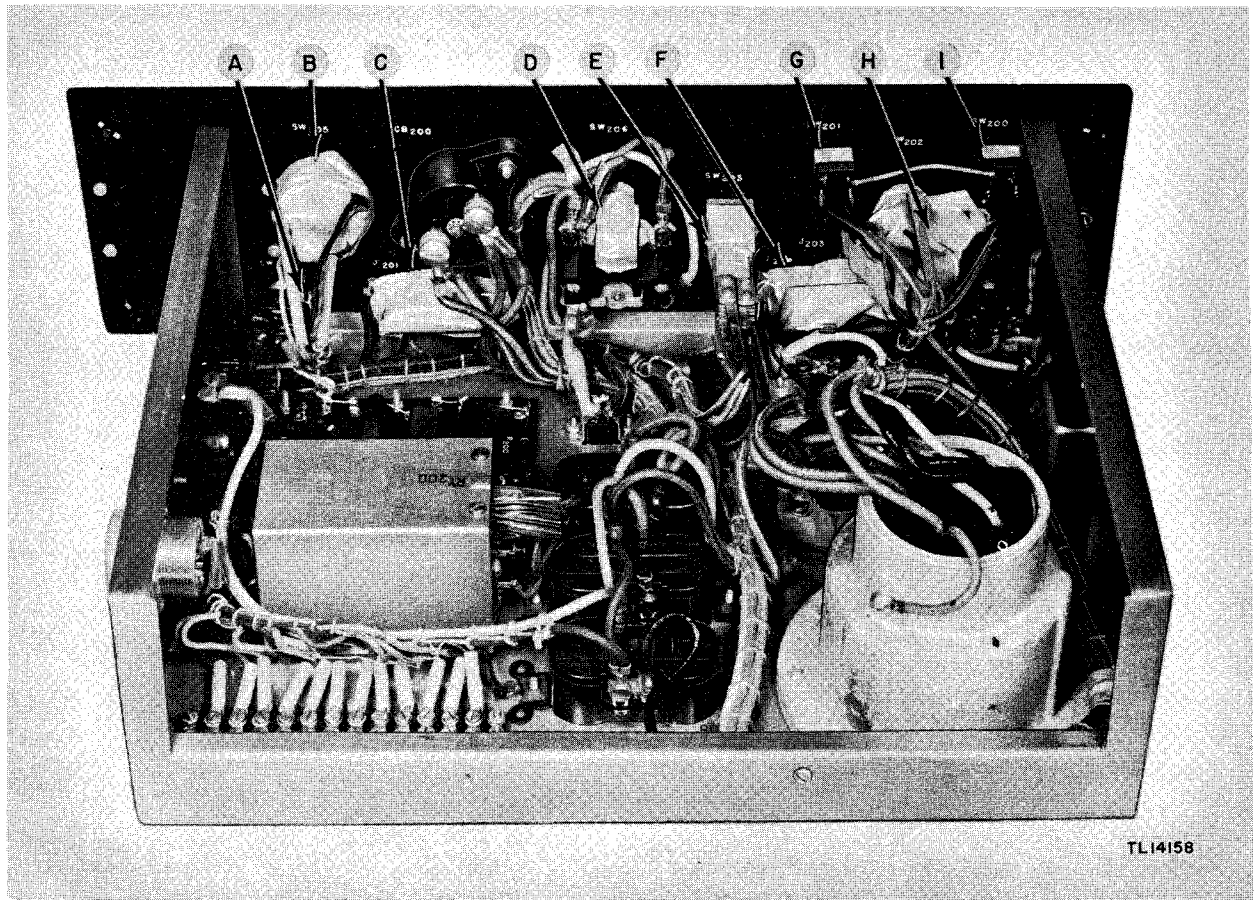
Junction Box JB-70-A—top interior view of chassis, showing method of masking.
